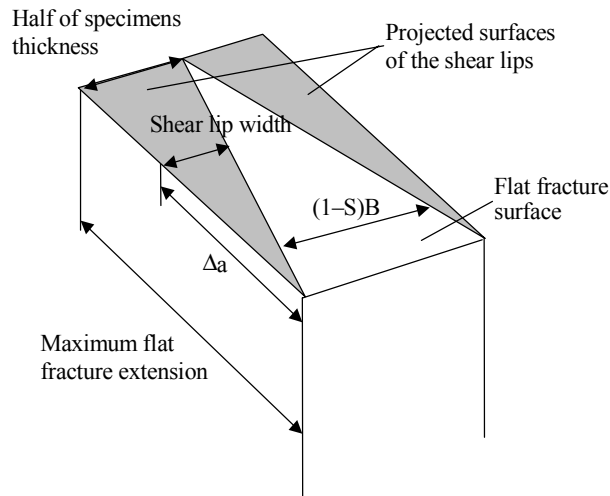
The projected surface of the shear lips on the plane of flat fracture.
